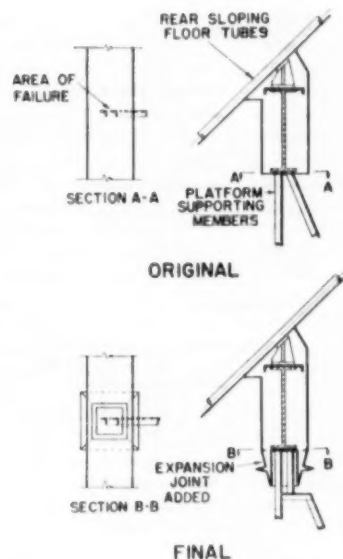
CONVECTION-PASS FLOOR WALKWAY SUPPORT
